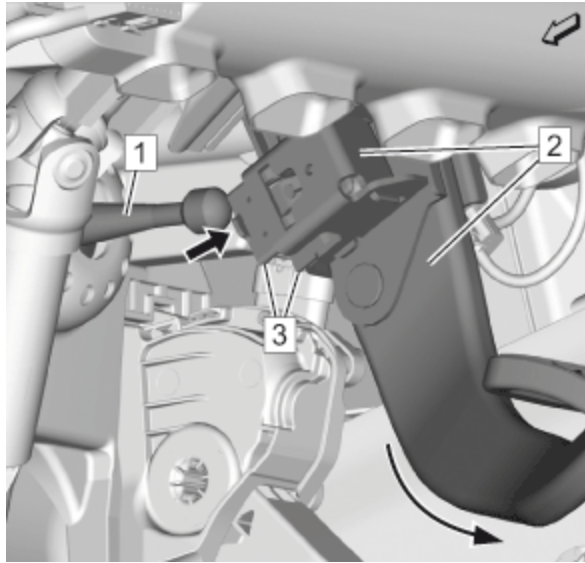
Brake Pedal Push Rod And Brake Pedal
